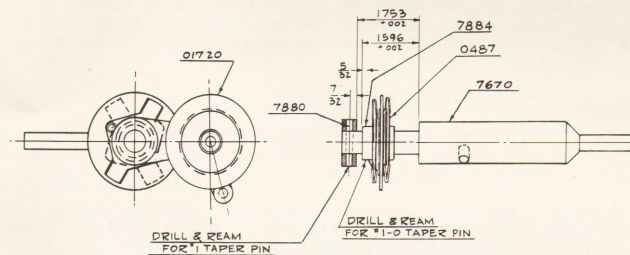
INTERLOCKING SWITCH ASSEMBLY.
